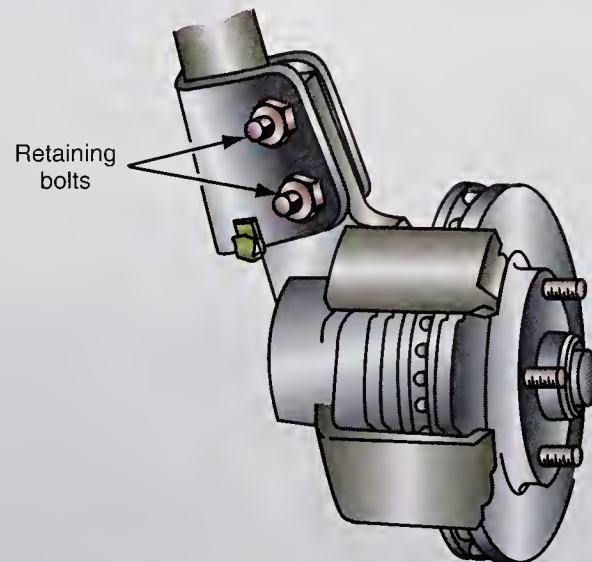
Lower end of strut installed in steering knuckle.
